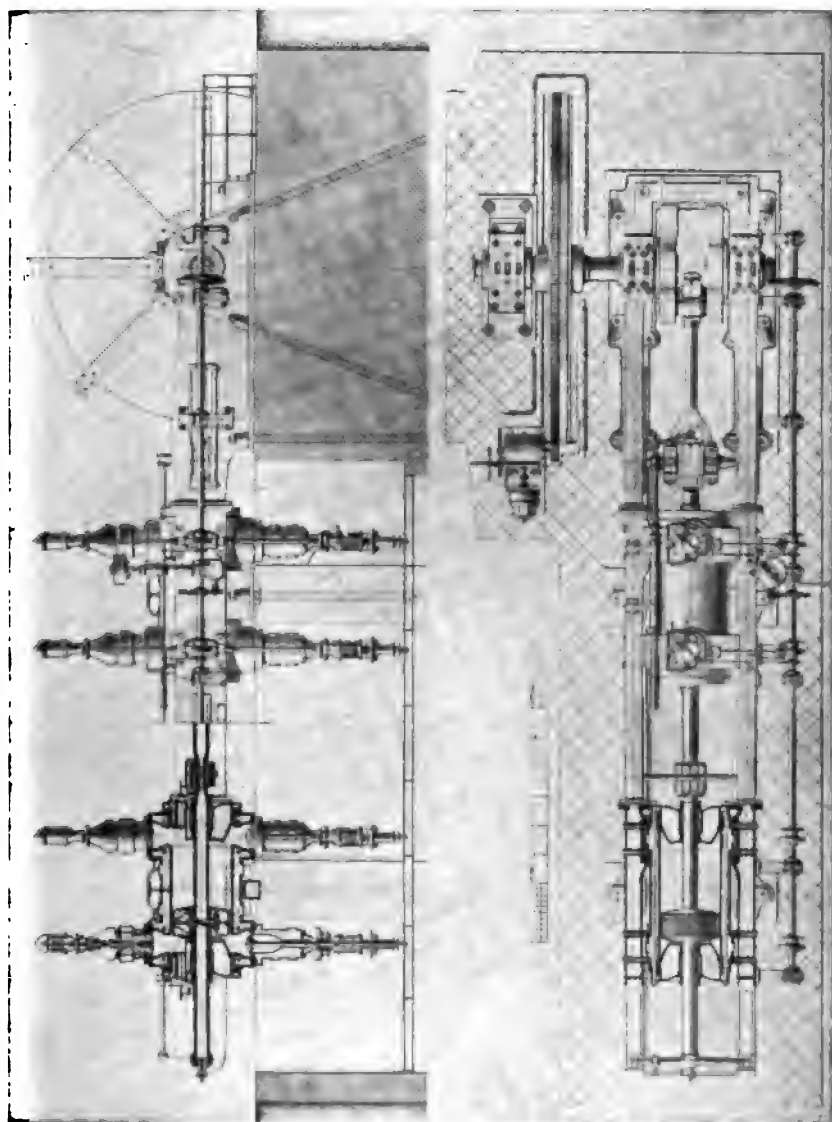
VALVE ARRANGEMENT OF THE COCKERILL ENGINE.
